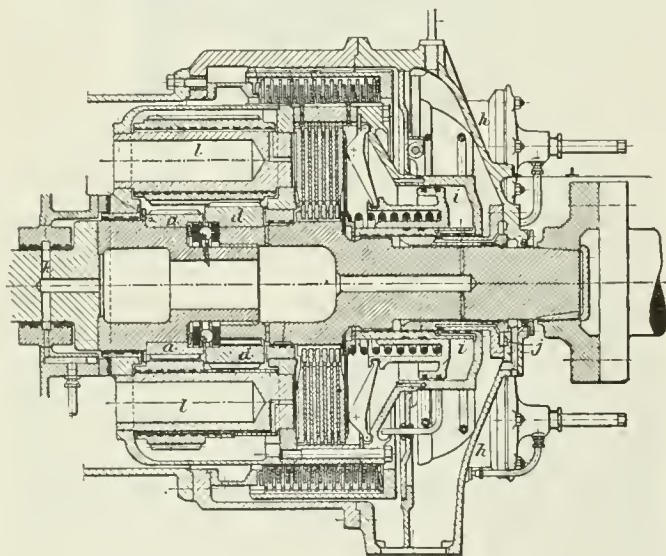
DETAILED VIEW OF THRUST BEARINGS AND LUBRICATION IN LJUNGSTRÖM EPICYCLIC REVERSING GEAR FOR MARINE TURBINES
